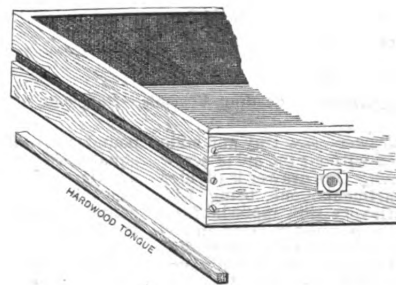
View of Front and Side of a Drawer, Showing Tongue and Groove.
